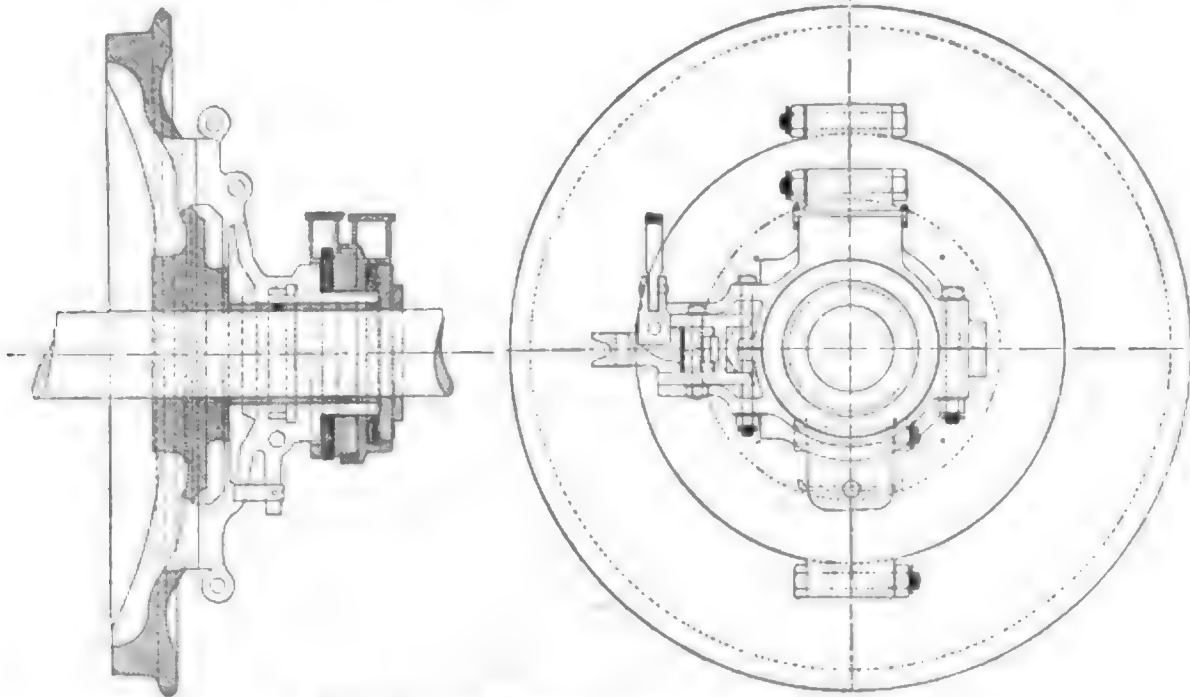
END VIEW AND SECTION OF CLUTCH ON THE PRICE CAR BRAKE.
